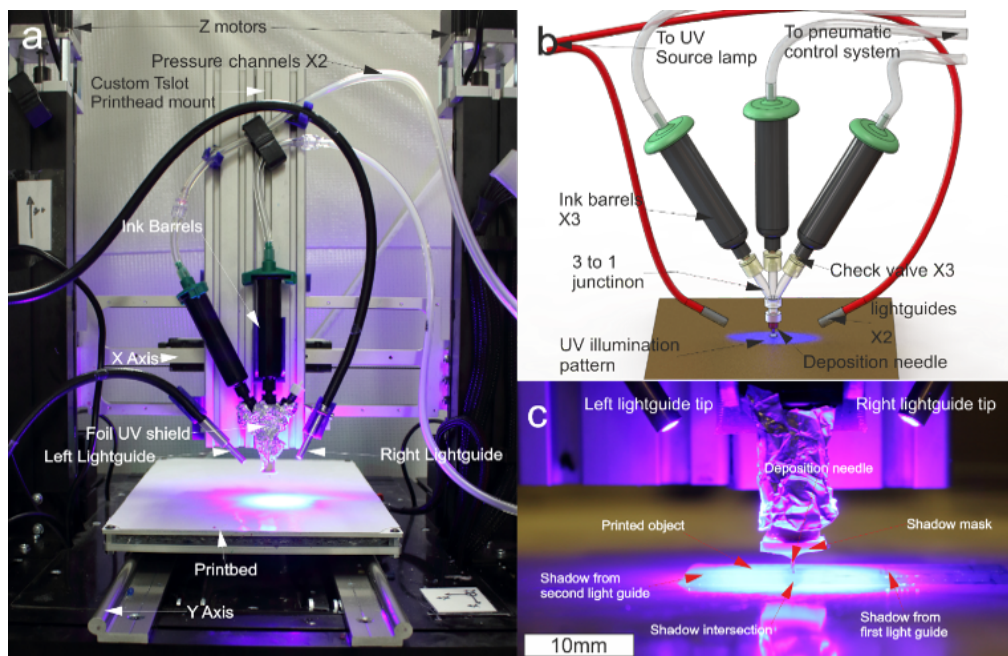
Illustration of the 3D printer. (a) Full view of the printer. (b) CAD model of the printhead consisting of the 3 ink reservoirs, attached to a common extrusion needle using a 3-way junction. (c) A zoom into the printing area, showing the arrangement of the lightguide tips, shadow mask, needle, and the resulting shadow pattern. A UV lamp (Omnicure S1000, vendor) along with two light guides (positioned 4cm away from the tip and at  $\sim 45^\circ$  to the substrate) provided the illumination ( $\sim 100$  W in the 300-400 nm wavelength) to initiate crosslinking of the extruded material.
